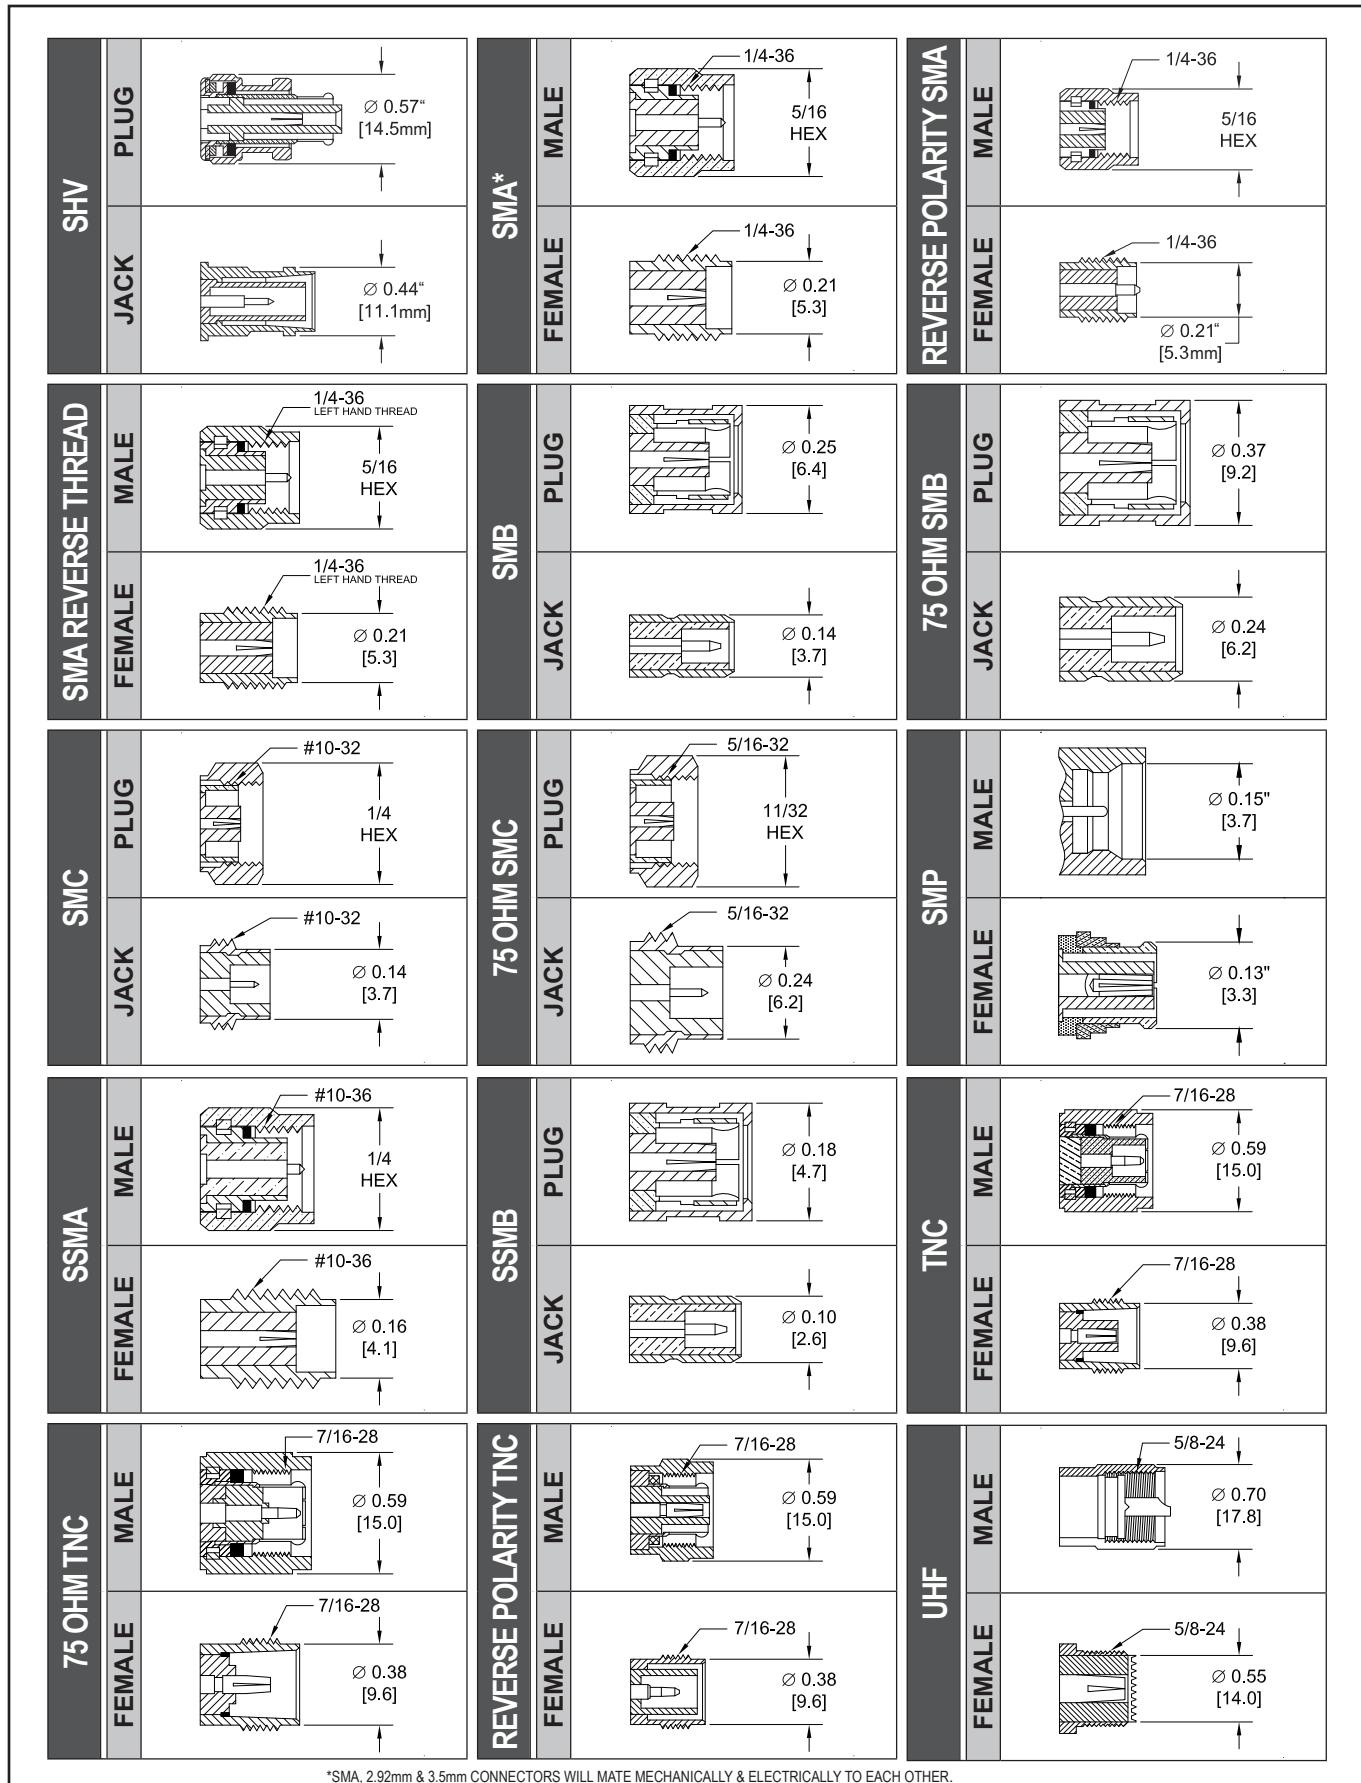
D – Connector side views, set 4 of 4. (Courtesy of Pasternak)
